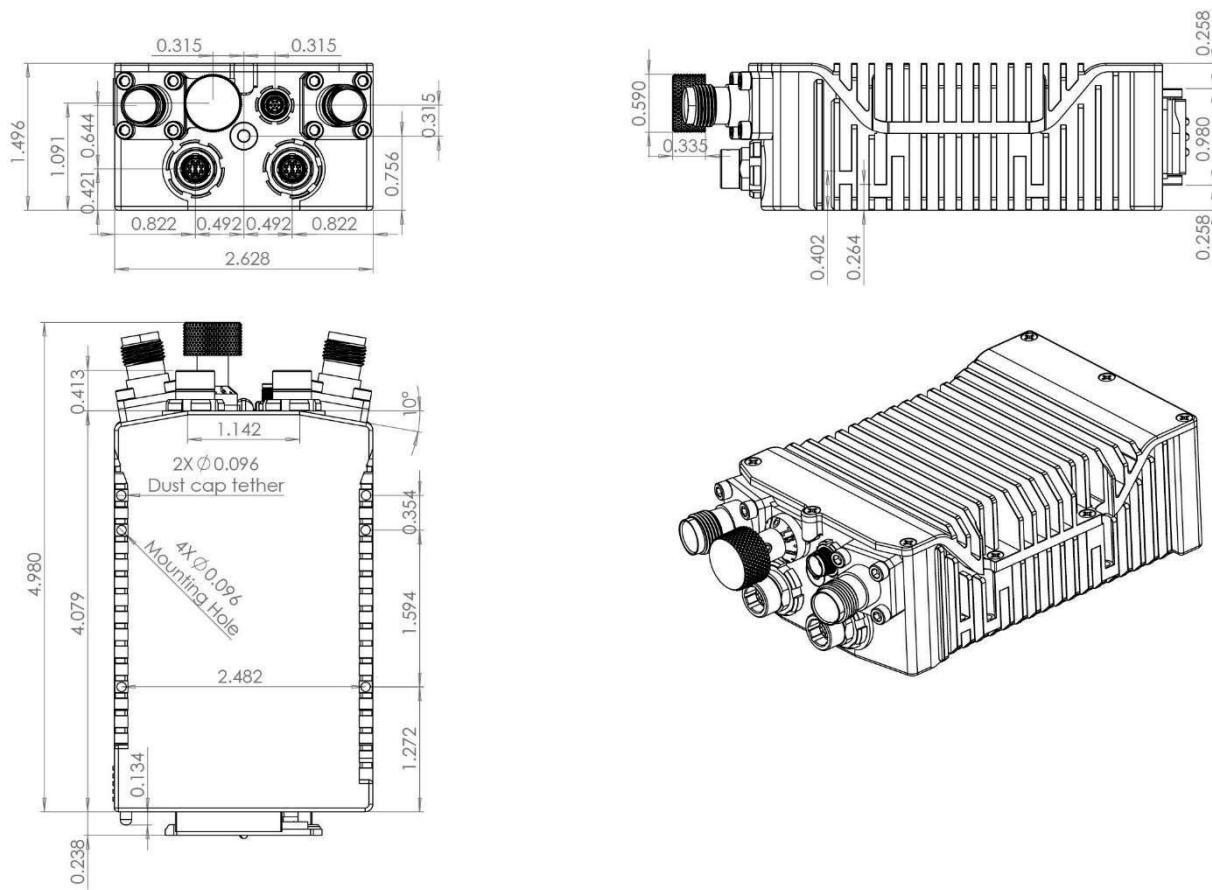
SC4200E Mechanical Drawing (top) and Mounting Pattern (bottom)
